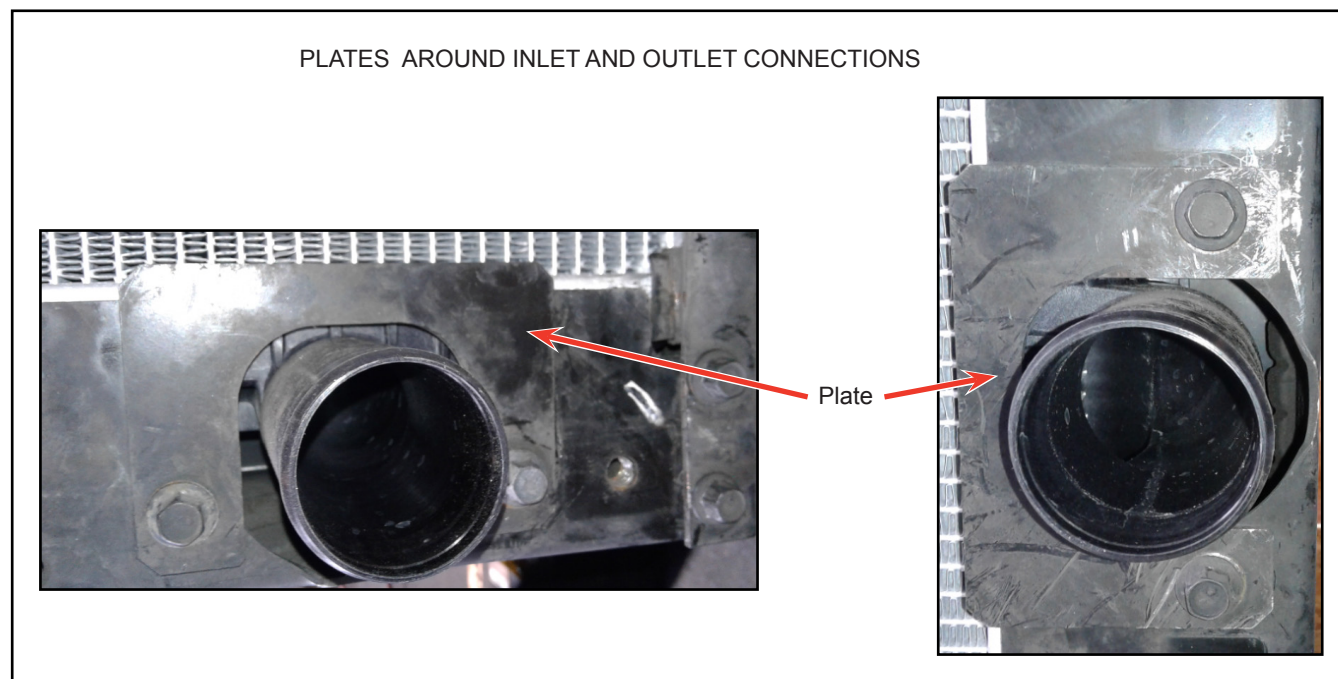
Typical View of Plate Installation around Inlet and Outlet Connections
